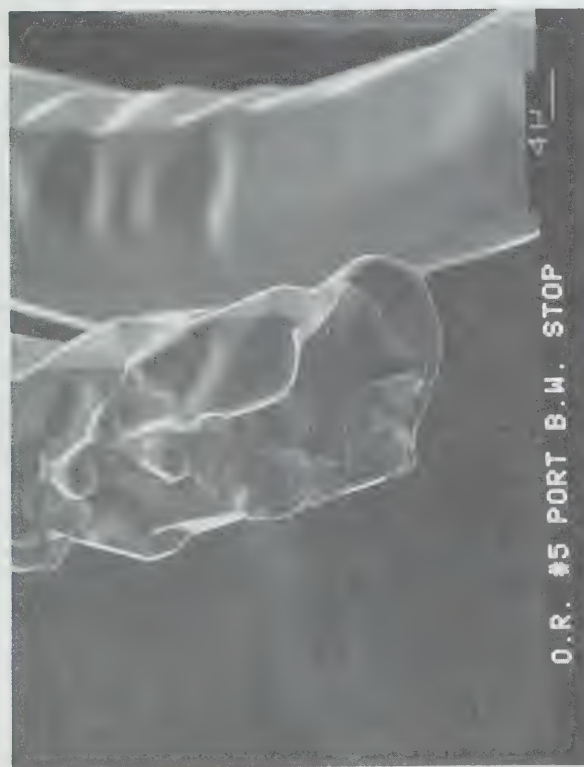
Smooth fracture surface of port ballast water stop bulb.
